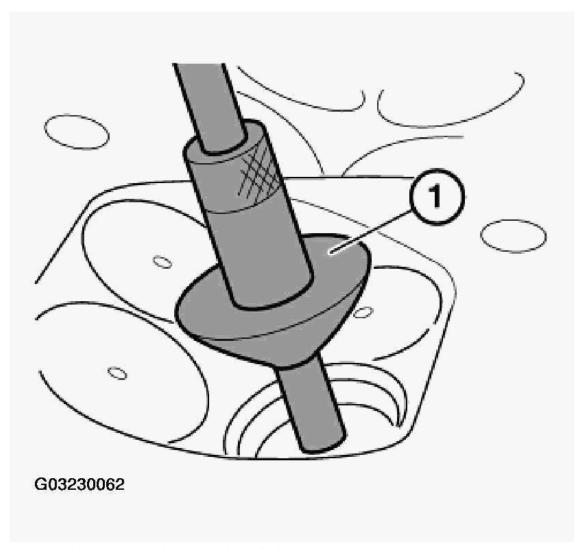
View of Reaming Tool And Guide Taper Courtesy of BMW OF NORTH AMERICA, INC.
